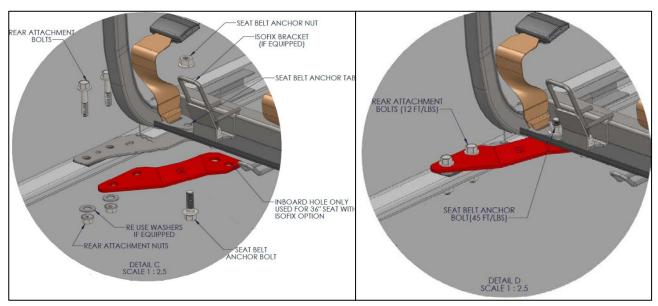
Bracket Installation - Thin Back - 30 Inch Seats (Driver's Side Shown)
